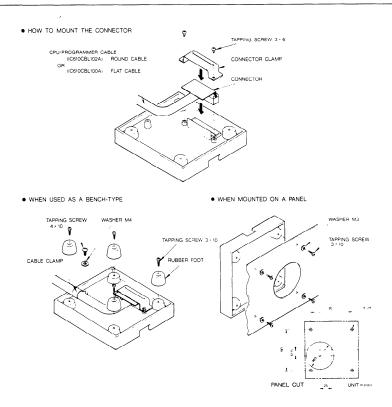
PROGRAMMER MOUNT ASSEMBLY
